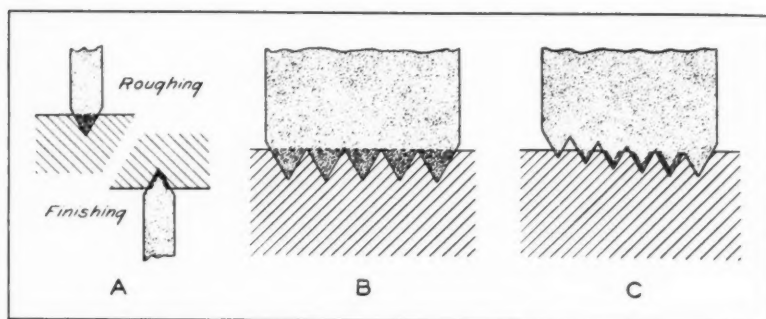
Diagrams Illustrating, Respectively, the Grinding Action of (A) a Single-edge Wheel; (B) a Plunge-cut Multi-edge Wheel; and (C) an Axially Fed, Conical, Multi-edge Wheel
